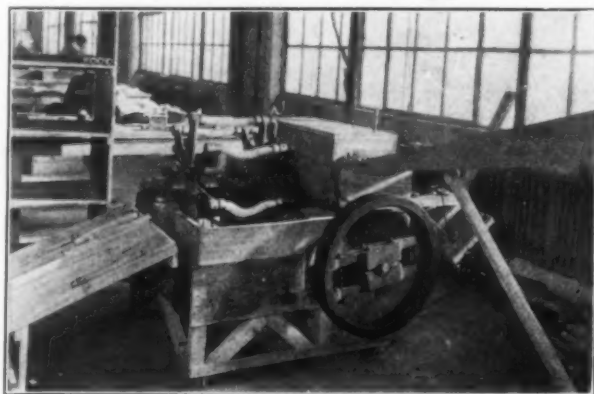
PRESSURE LEAKAGE TESTING MACHINE FOR FLEXIBLE HOSE.
